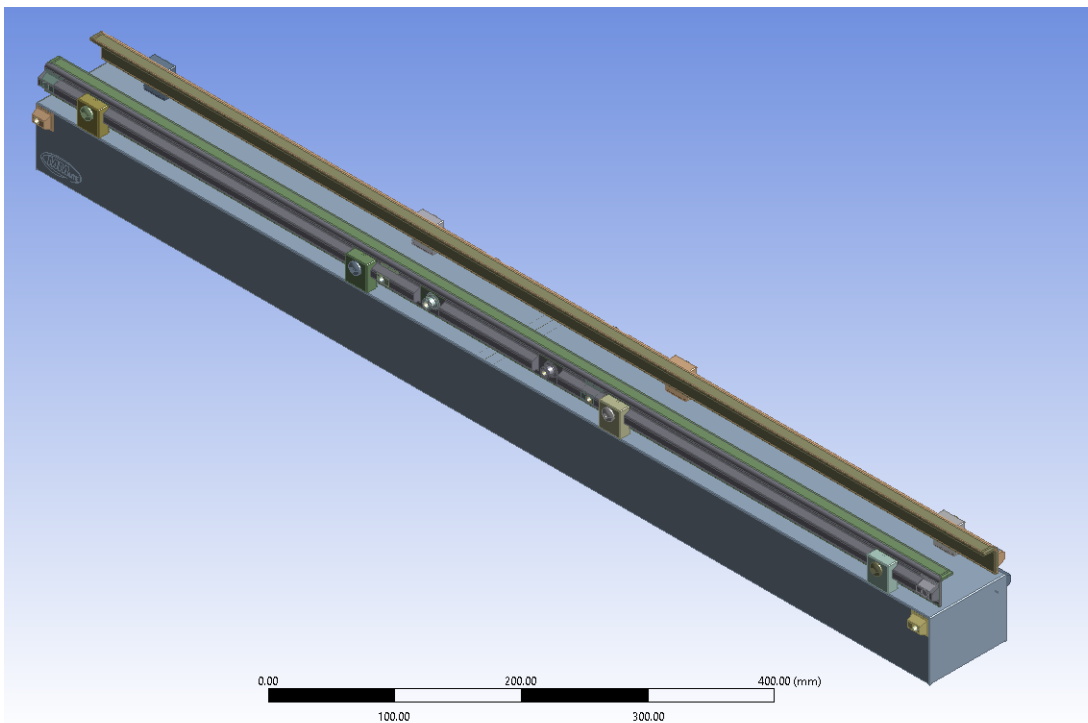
Full 3-D CAD Model of Linear Magnetic Motor (One Motor)
